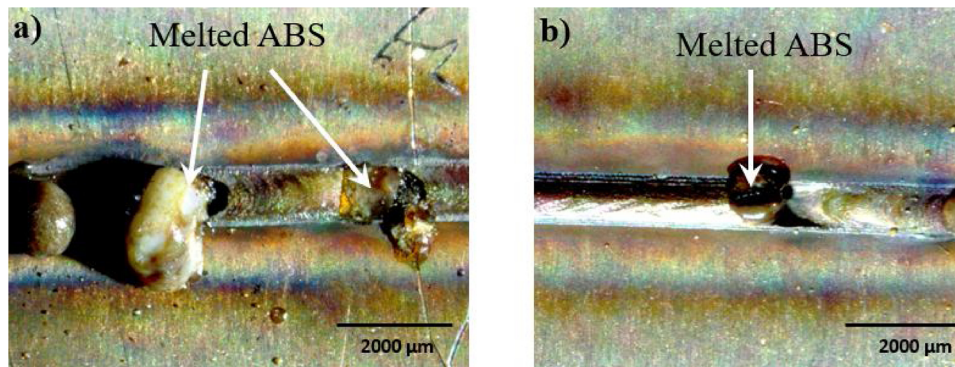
Weld bead appearance on the stainless steel surface at welding speed of a) 4.2 mm/s, b) 8.2 mm/s.
